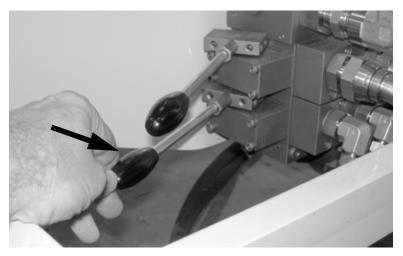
Start the feed motion by pushing the bottom lever to the right. The cutting drive lever must be engaged when you do this.
